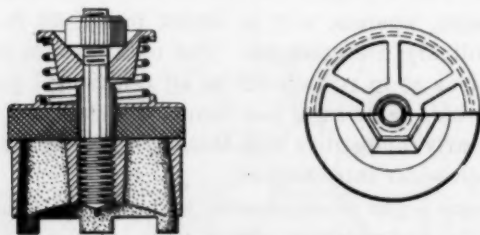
DETAIL OF VALVE STEM AND SPECIAL NUT LOCK
